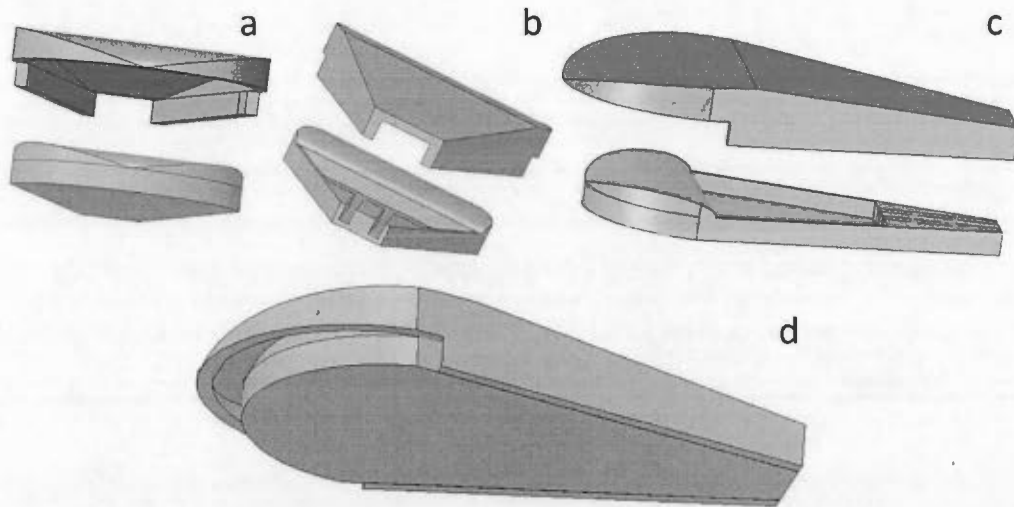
PAS fourth concept design top part. (a) Back view. (b) Side view. (c) Front view. (d) Bottom view
